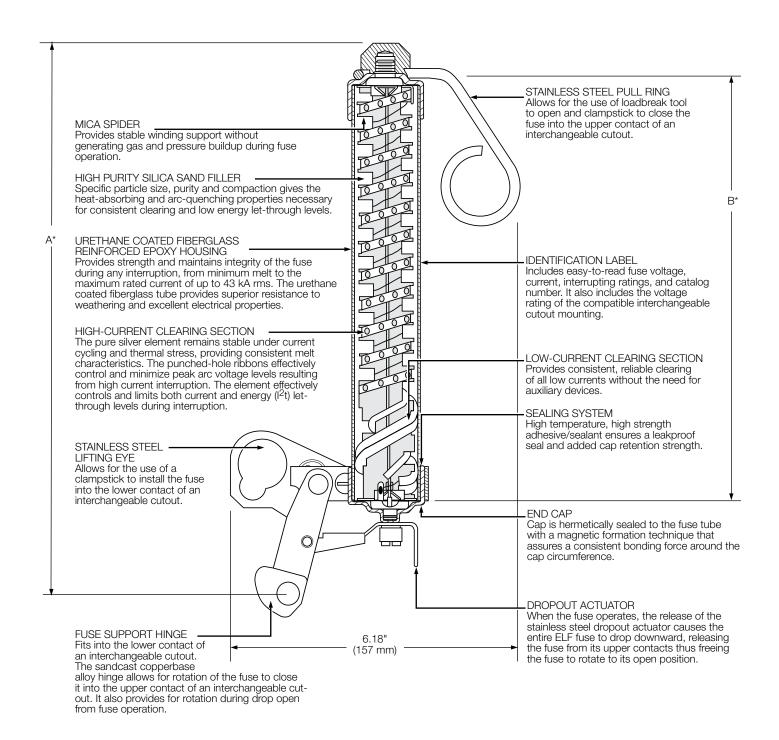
Line illustration of single-barrel ELF fuse cutaway with dimensions.
